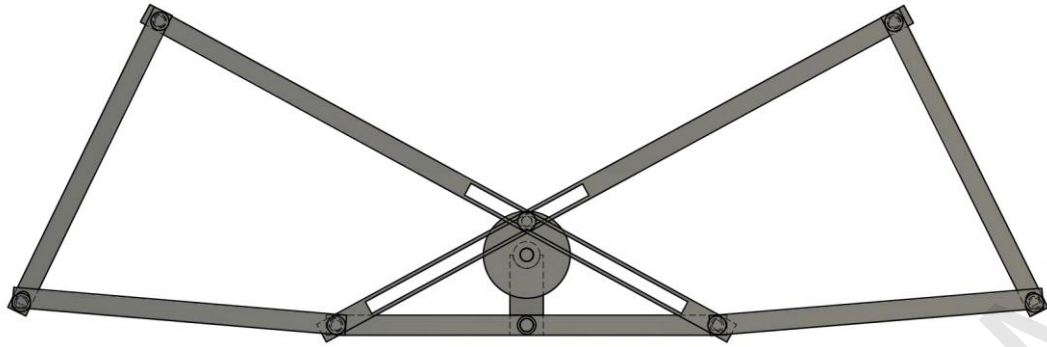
CAD Model of Mechanism Design I for Flapping Actuation
